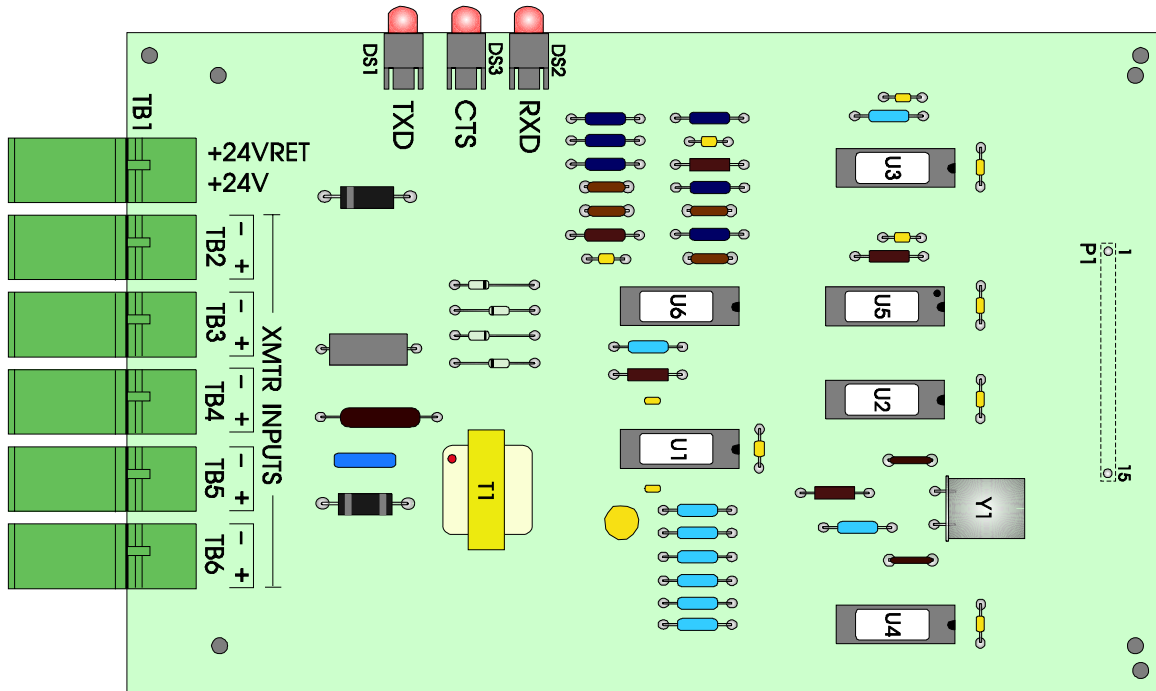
24V Transmitter Intf. Board P/N 392523-01-9 (RTU 3310 or DPC 3330)
